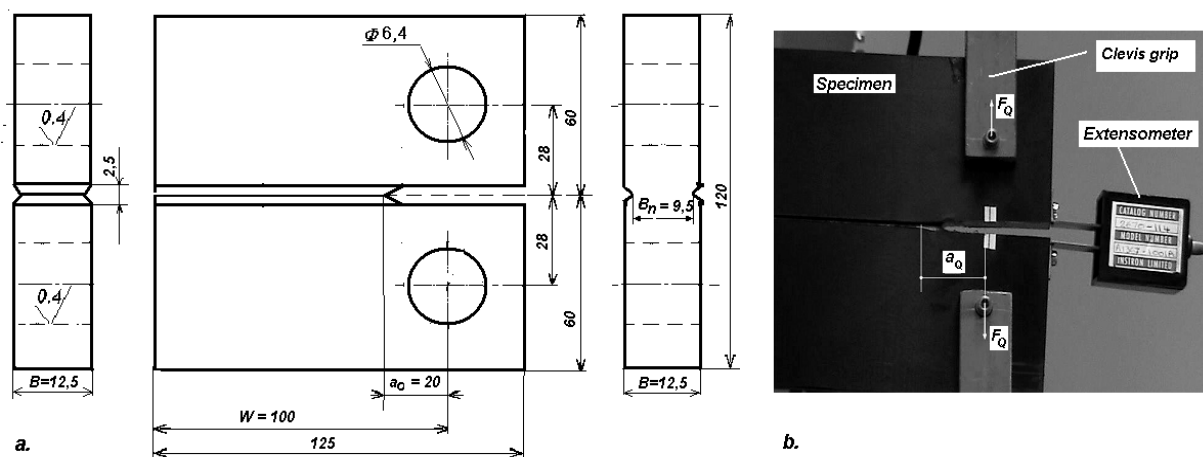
CT 100 specimen and testing facilities: a – specimen sketch ; b – testing facilities.
